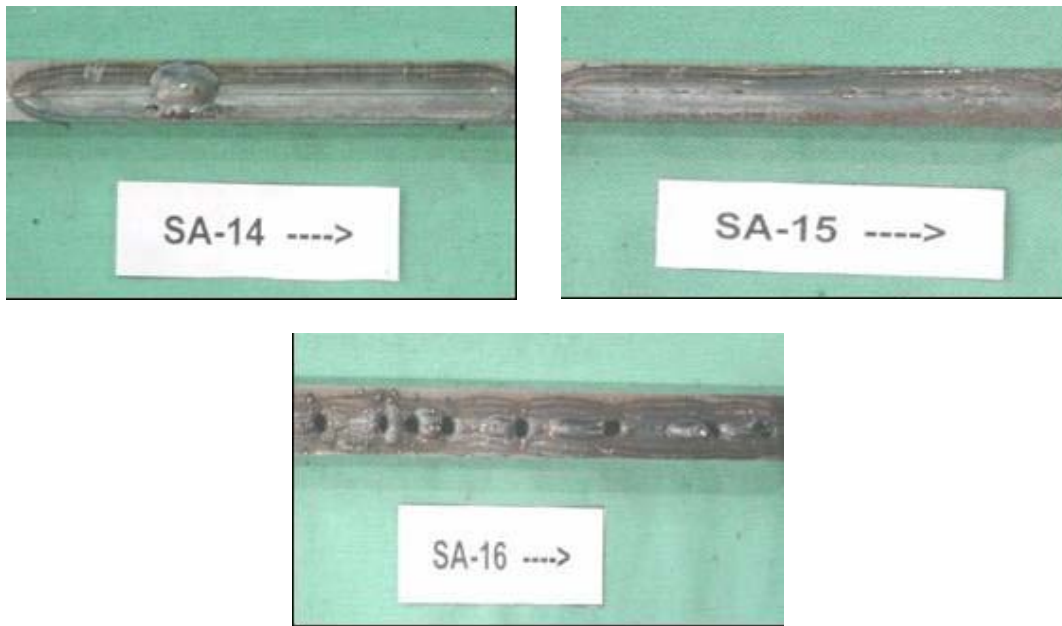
View of Typical Penetration Bead Profiles in Welds SA-14 through SA-16
